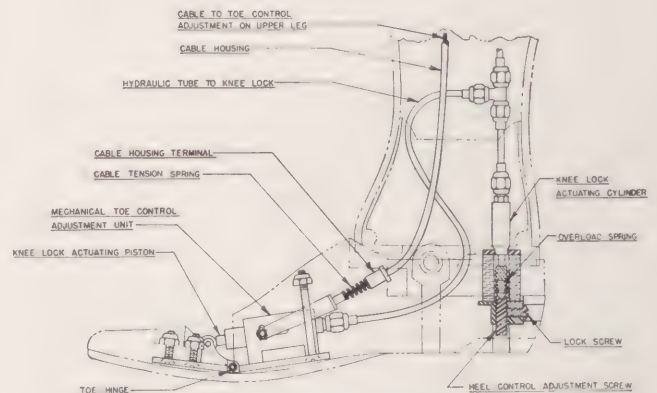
Foot assembly with toe hinge and mechanical control adjustment unit.
